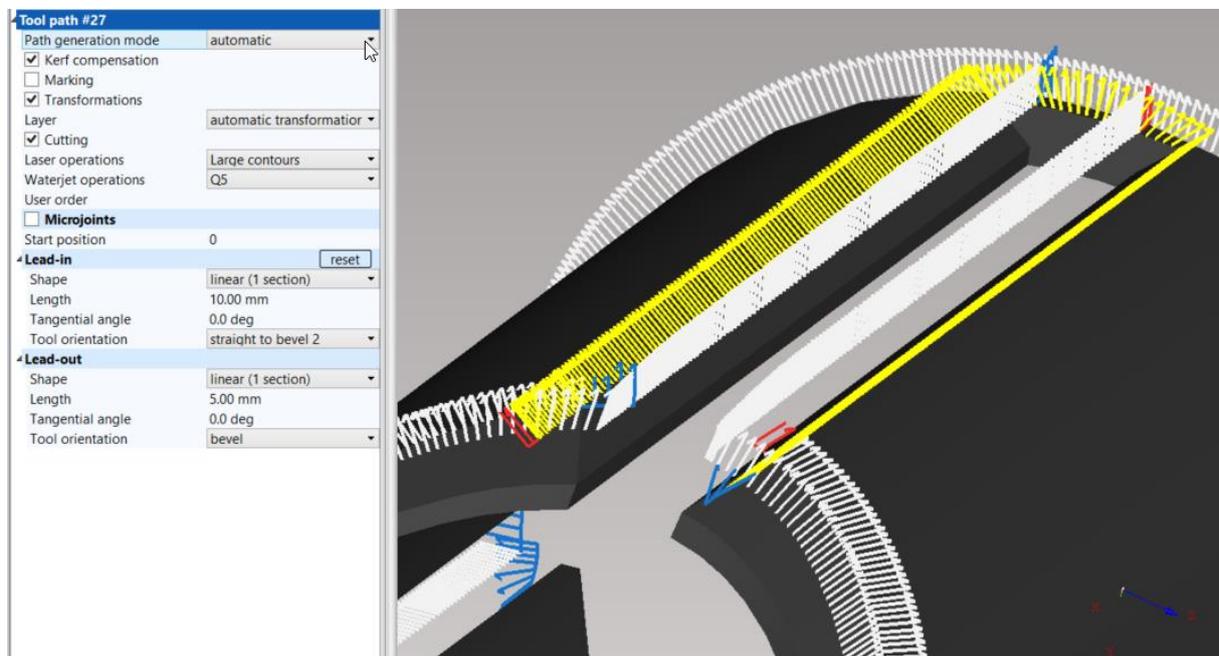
Complex surfaces and weld edge preparation – automatic mode
